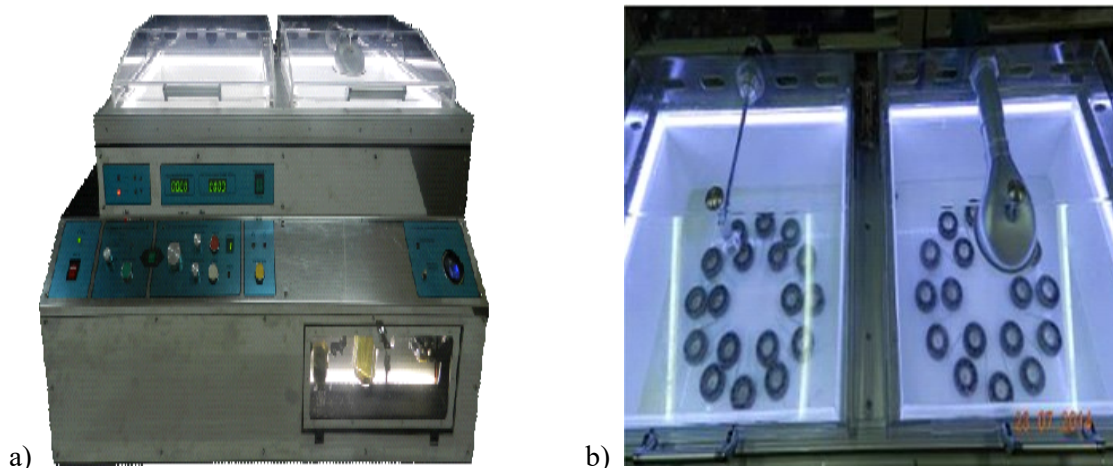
The turbine engine bearing pre-operational preparation stand: a) external appearance of the stand; b) cleaning and drying chamber for assembled ball bearings
